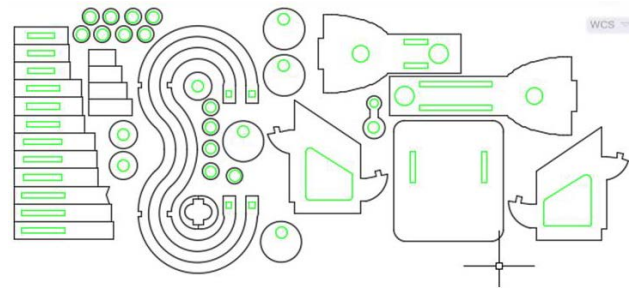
AutoCAD drawing of parts for SMM, prepared for laser cutting
